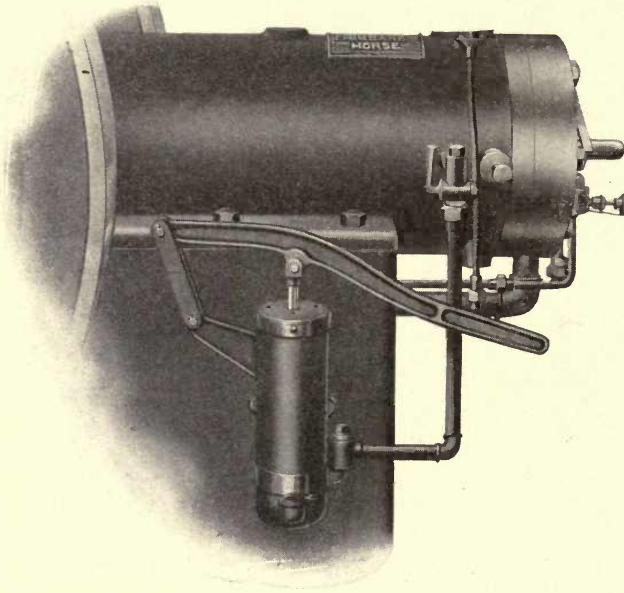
Starting Gear of the Fairbanks-Morse Engine.
